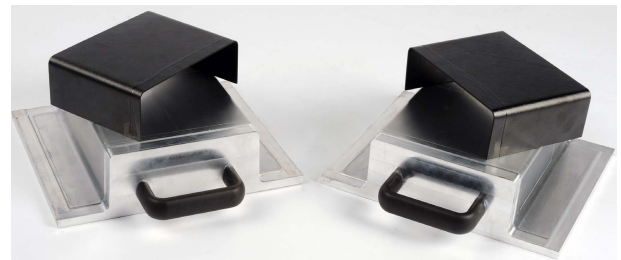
Nominal and compensated tooling with fabricated C-profile
